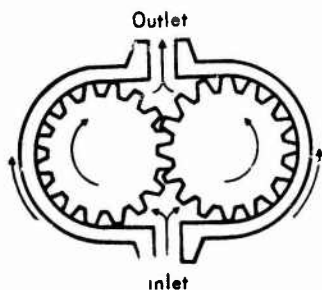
Typical Positive-Displacement Gear Pump or Motor
